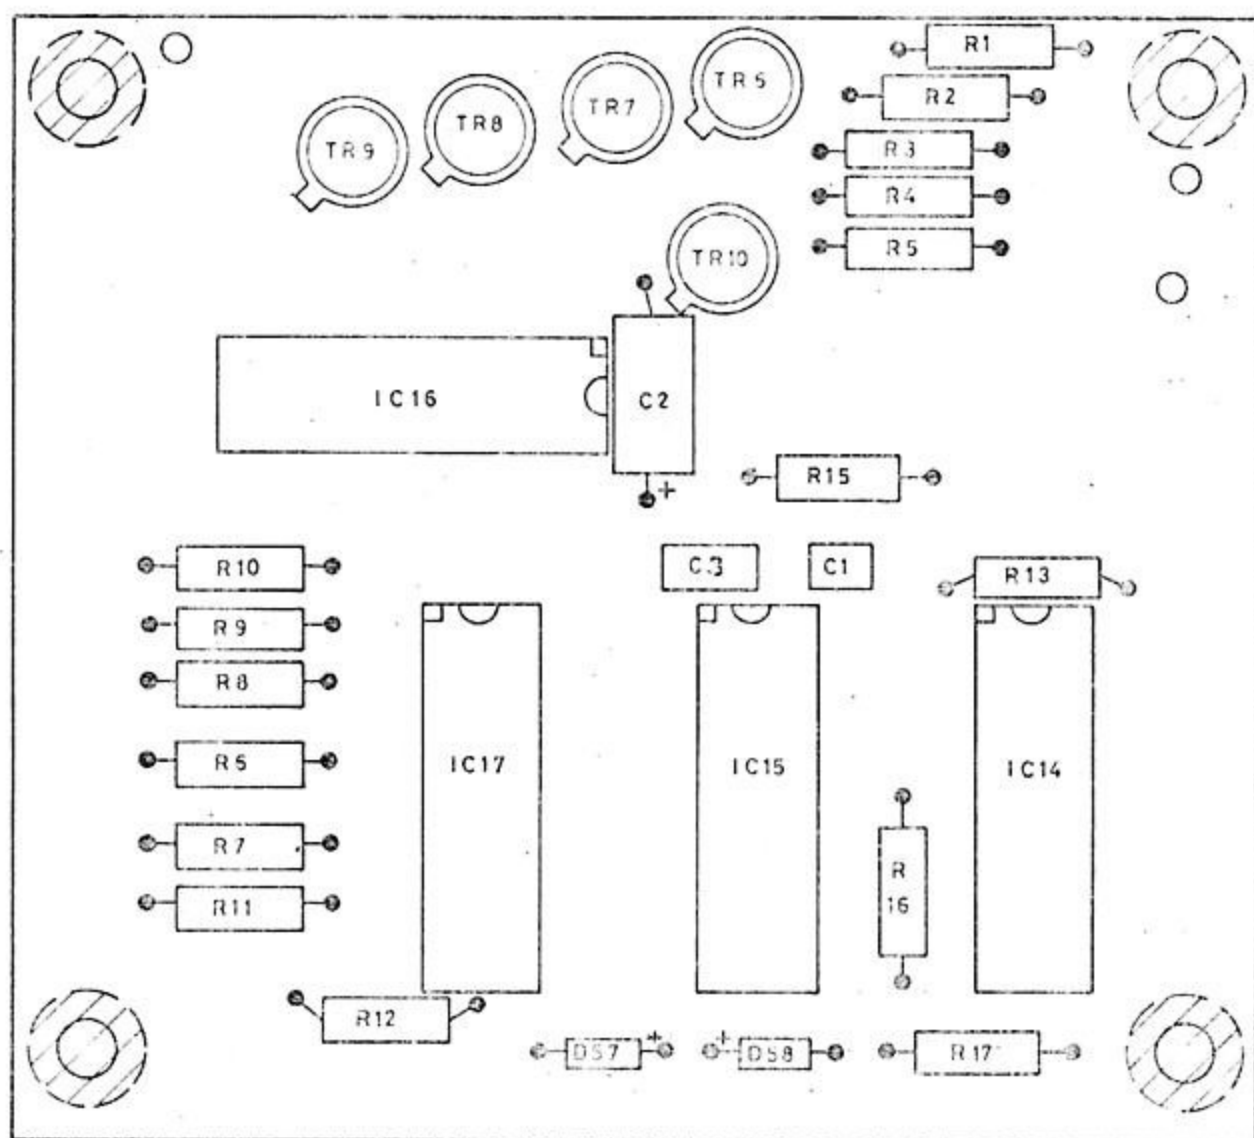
Display driver board (Plessey Stock No. 419/1/40281):
